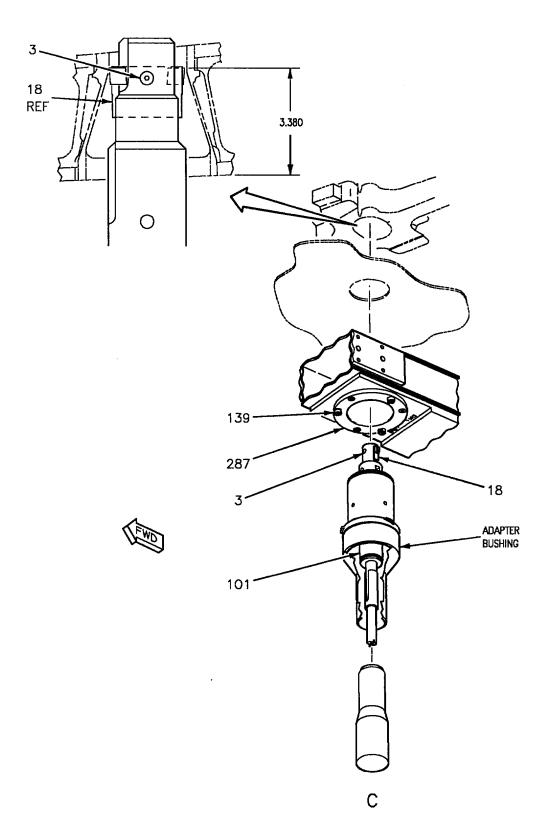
Boring Upper and Lower Skins, Installation and Boring of Outboard Pylon Post Bushing (Sheet 2)
